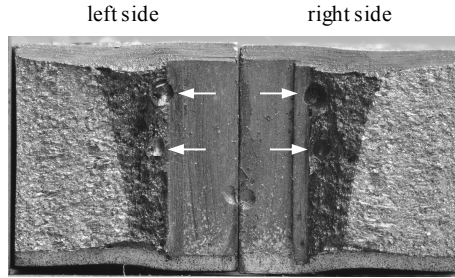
Fracture surface for specimen WP2-03 clearly showing the presence of natural weld defects in the zone of ductile crack extension (indicated by white arrow signs)
